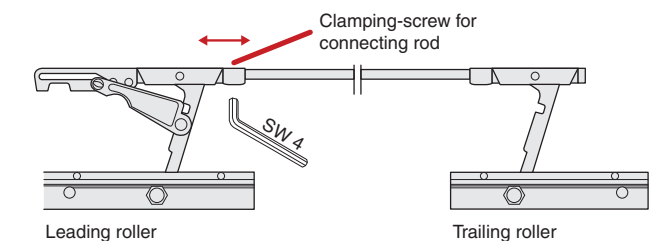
Adjust by loosening / tightening the clamping screw on the leading roller positioned on the bottom rail.
